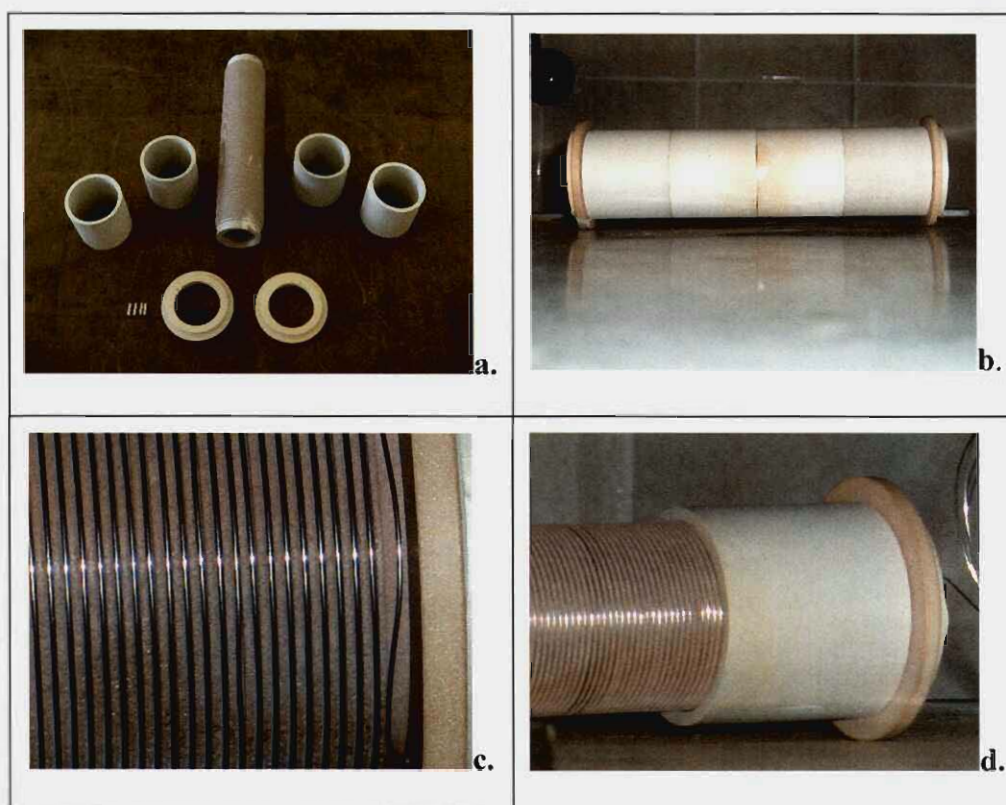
The tube furnace where (a) shows all the components, (b) shows the full assembly, (c) illustrates the grooves in which the wire is placed and (d) illustrates the cylinders covering the wire.
